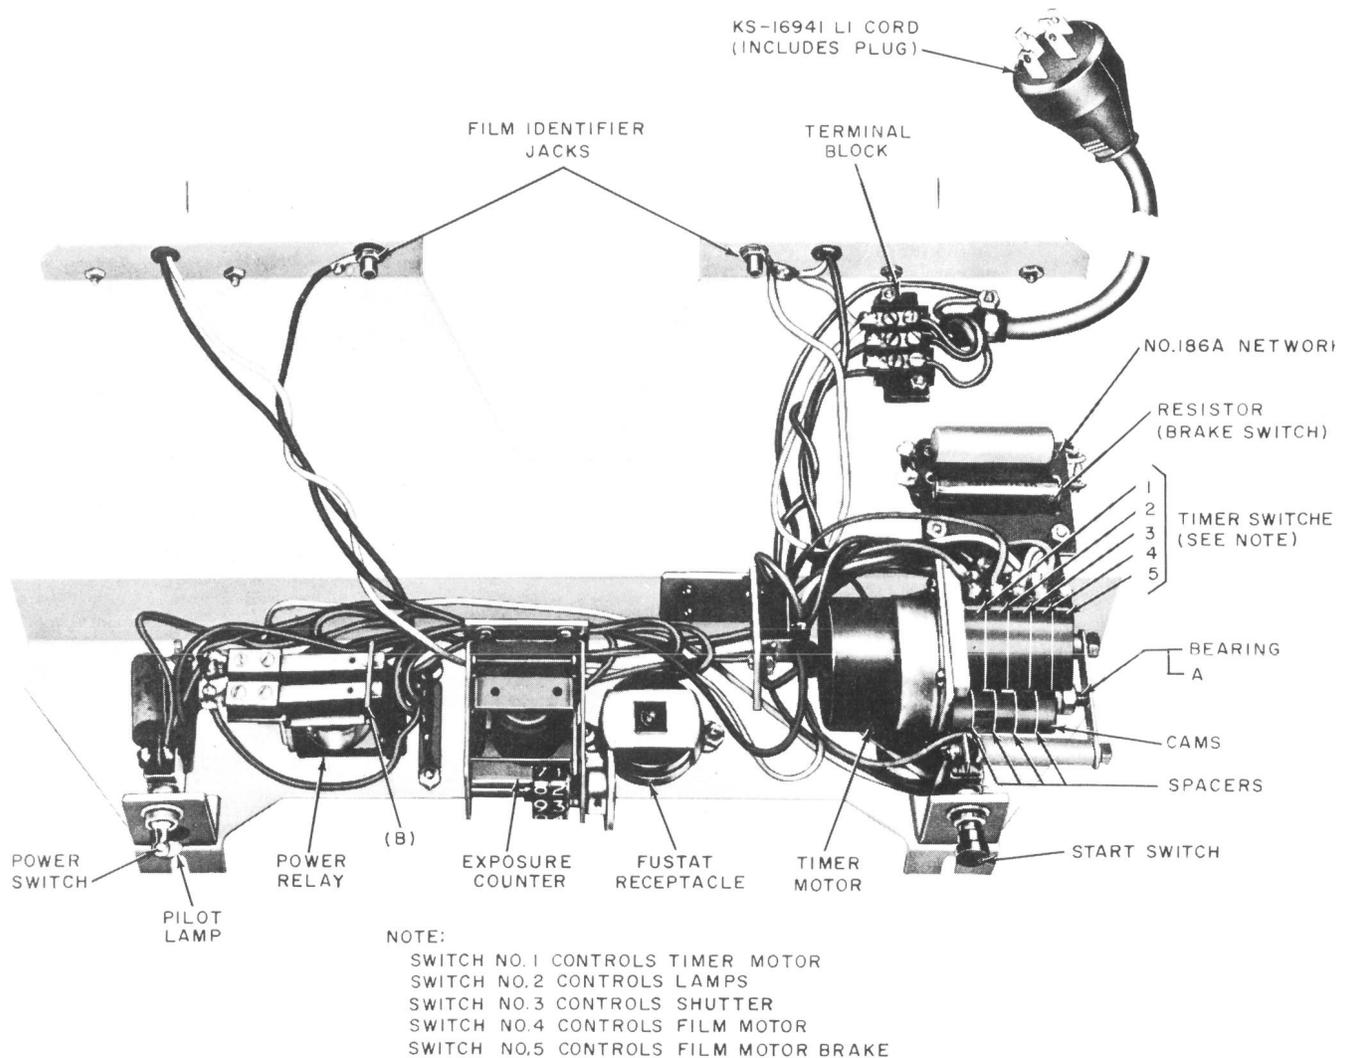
KS-14776 Camera Chassis Removed From Hood
